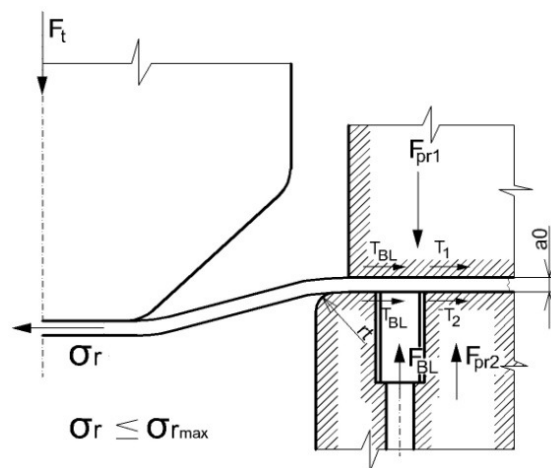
Forces on contact surfaces at deep drawing with flat restriction bars
